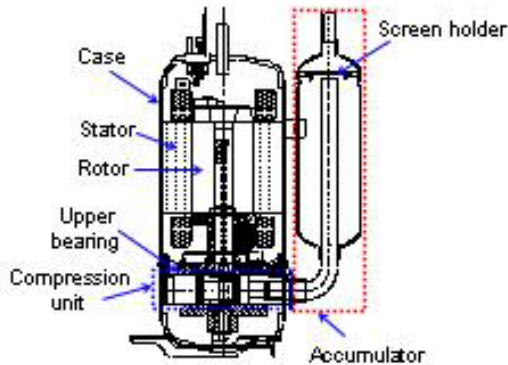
Cross-sectional view of the rotary compressor for air conditioner
